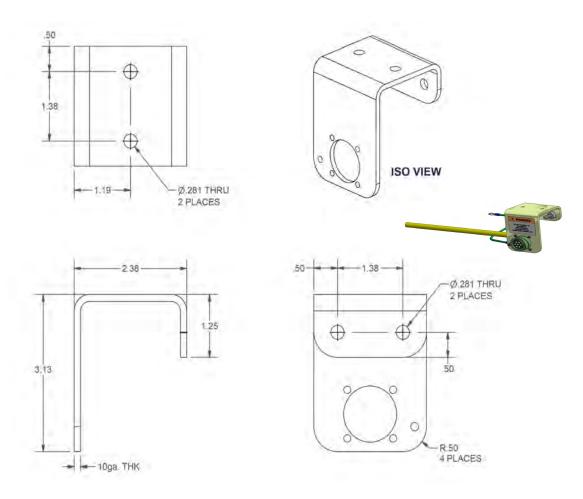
HHRC Bulkhead Bracket Installation Dimensions
